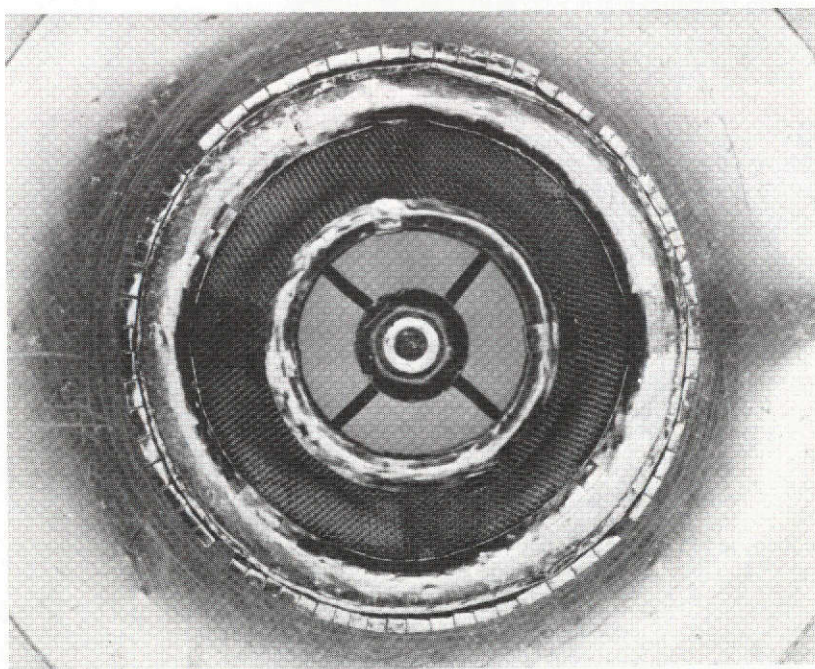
Cathode pole piece-baffle assembly with tantalum foil covers, before test.
